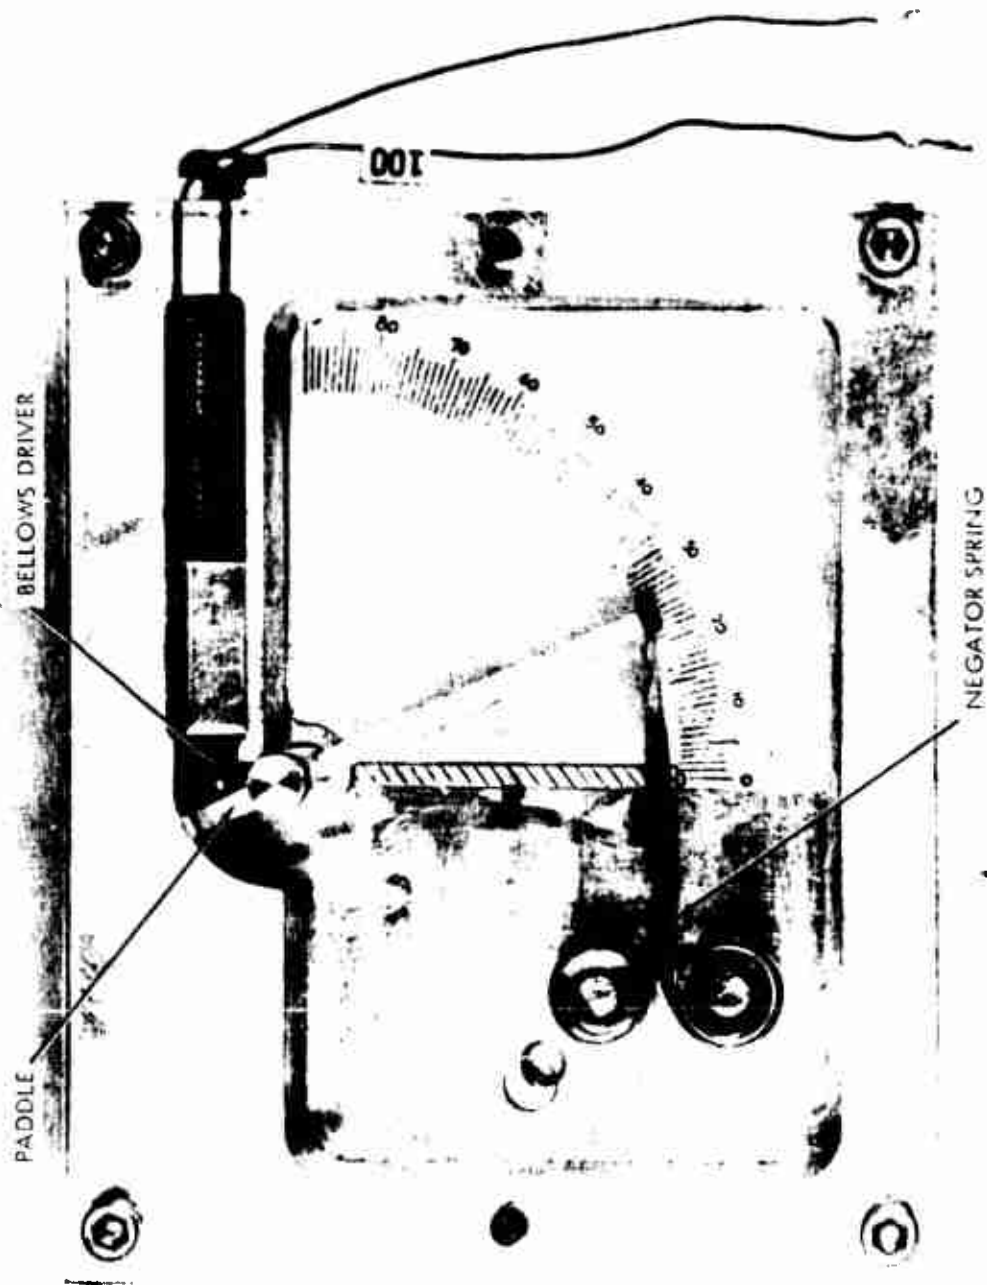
BELLOWS DRIVER OUTPUT TEST FIXTURE
